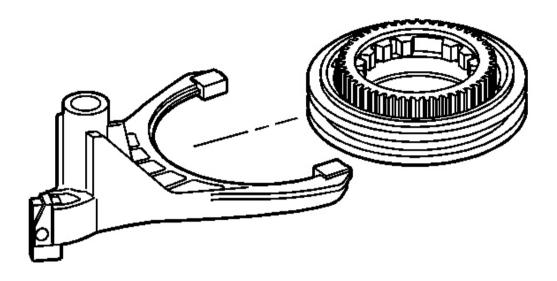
Lockup Mode Shift Fork & Lockup Shift Assembly Courtesy of GENERAL MOTORS CORP.
